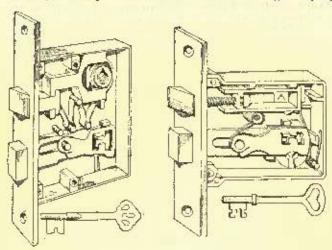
Reversible Lock, Hop-kine & Drokinson Mfg. Co.
